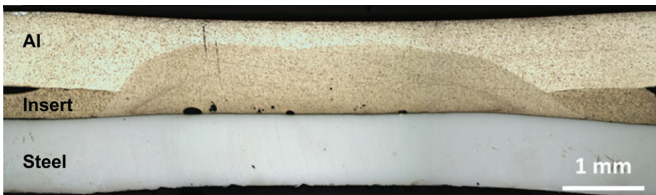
Macrostructure of the final Al/steel joint welded using an F-type electrode on the Al side and a dome-shaped electrode on the steel side. Welding current = 19 kA and welding time = 67 ms in a MFDC machine.
